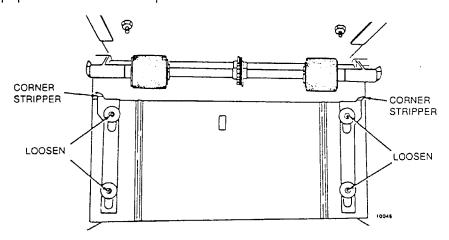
CORNER STRIPPER ADJUSTMENT
